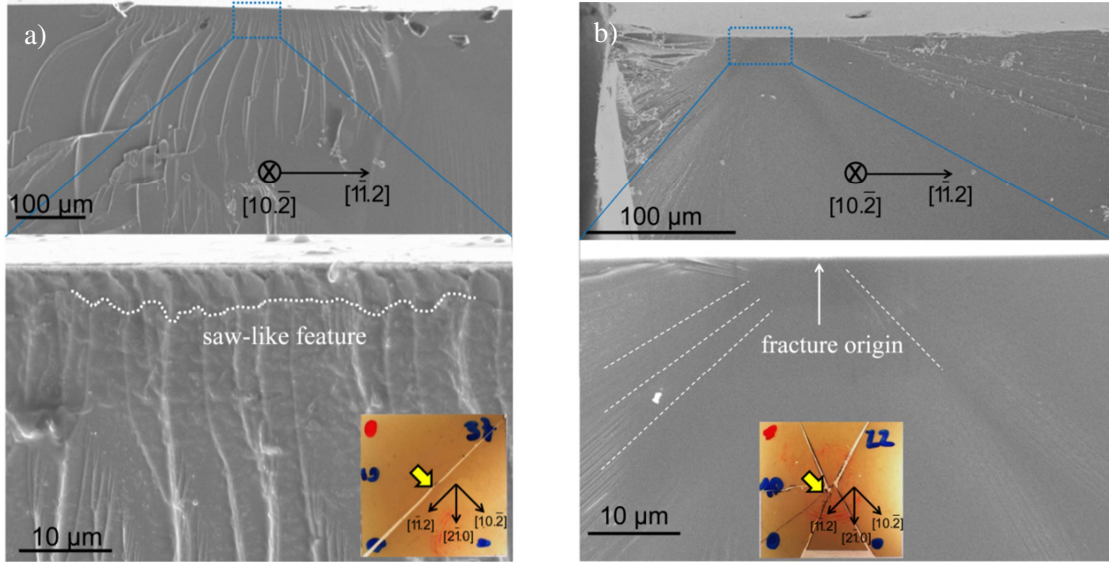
Fracture surfaces of two $12 \times 12 \times 0.35 \text{ mm}^3$ LiTaO₃ specimens failed at low loads. A “pre-damaged” area followed by a “post-damage” (saw-like) zone is only found in a). The surfaces of the B3B broken specimens are inserted for illustrative purposes.
